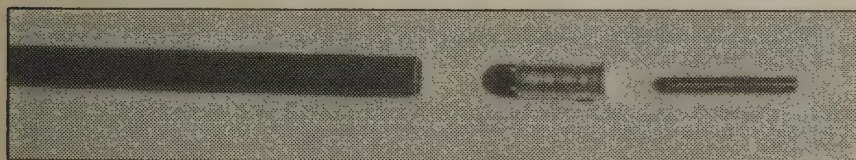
Photo B. Construction technique using aluminum arrow shaft, threaded insert and threaded brass rod.
